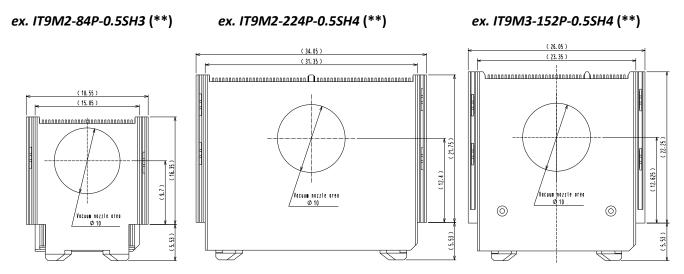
Pick Points of IT9 Plug (dimensions in mm)
